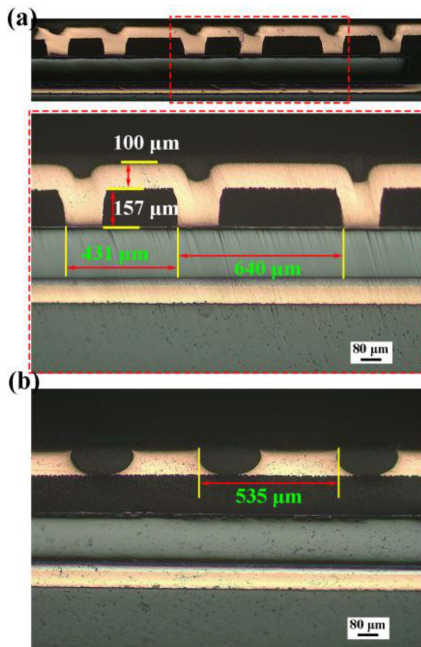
Cross section of PCB embedded packaging cell with AMB carrier: (a) cross-sectional view with RDL connected to SiC MOS and (b) cross-sectional view with RDL unconnected to SiC MOS.
